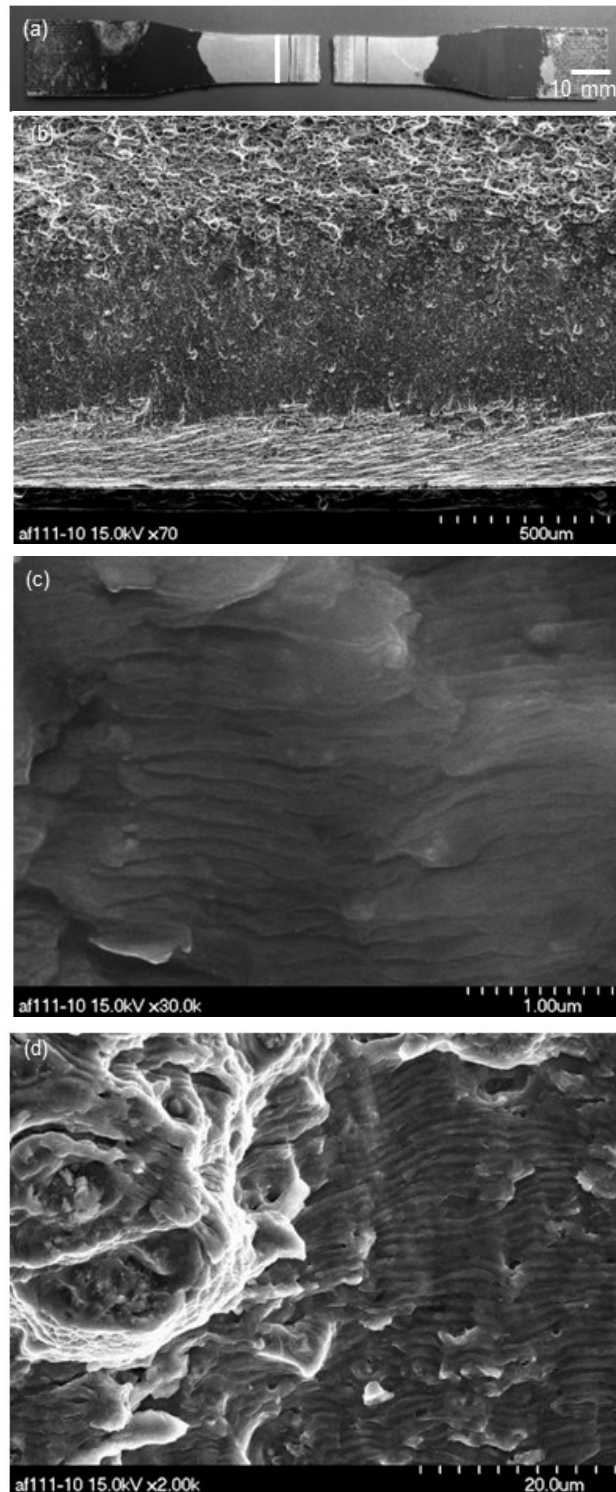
Fracture surface when a LOP is the origin of fracture ( $\Delta\sigma = 275$  MPa, failed at 5k cycles) (a) top view, (b) fracture surface between the LOP and the final failure surface, (c) 0.30 mm from the bottom surface, and (d) 0.74 mm from the bottom surface
